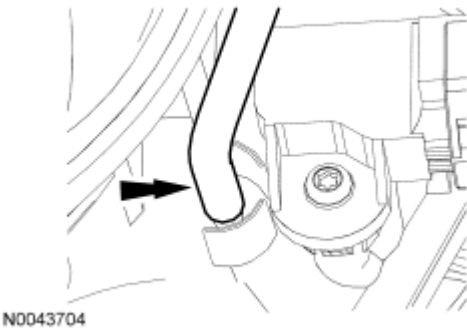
Locating AIR Valve Vacuum Supply Tube
